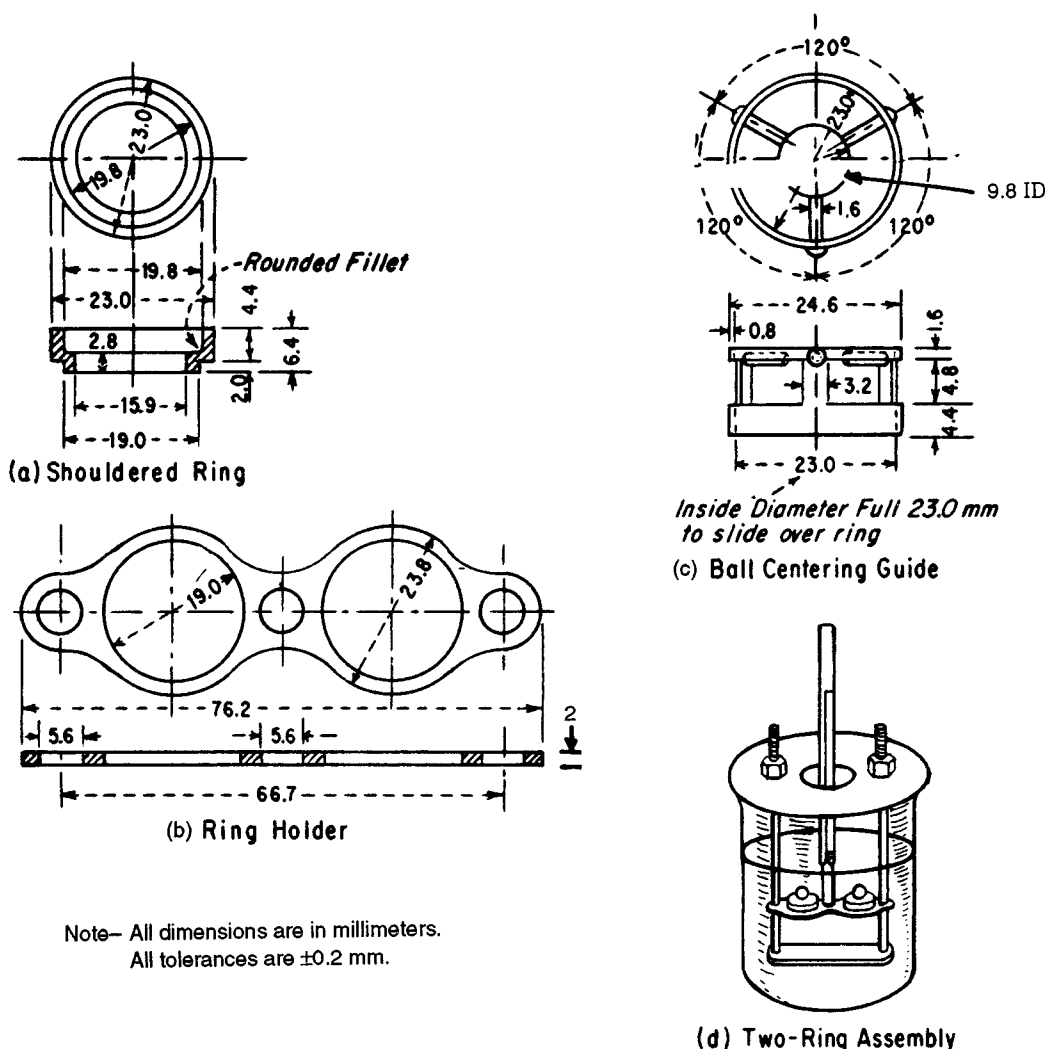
Shouldered Ring, Ring Holder, Ball-Centering Guide, and Assembly of Apparatus Showing Two Rings
